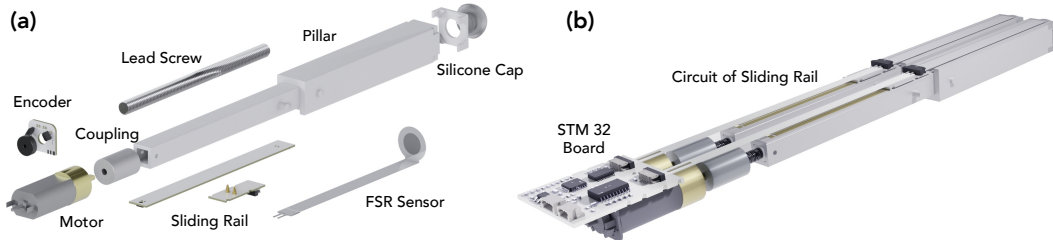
(a) The exploded view of a single pillar. (b) The assembled modular unit of a 1×2 array.
